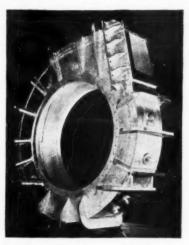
Pump casing, utilizing components shown in Fig. 17.
